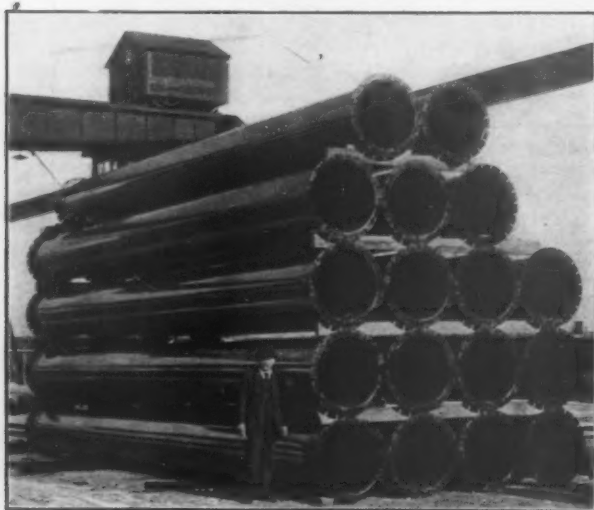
Some 30-In. Lap Welded Dredging Pipe, 32 Ft. Long. Made by the American Spiral Pipe Works, Chicago, Ill.
